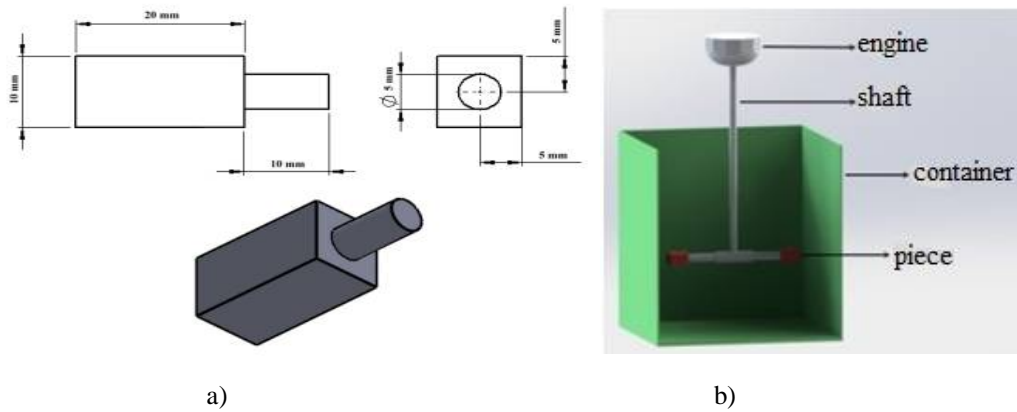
a) Wear test specimen dimensions b) Abrasion test assembly
